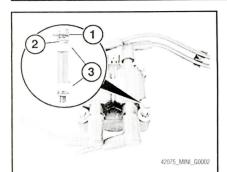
Screw (1) and spacer tube (2) are only available as a single set Check insulating rings (3), replace if necessary
